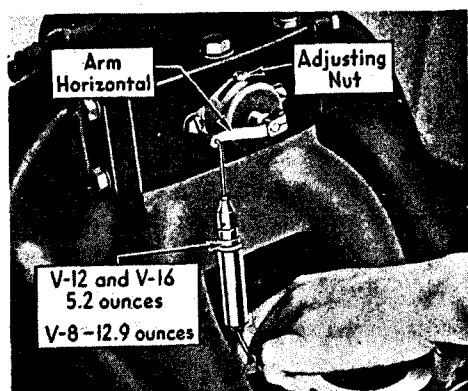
The thermostat in the semi-automatic choke on Cadillac cars should be adjusted by loosening the adjusting nut and sliding the thermostat stop until the required pull as indicated to hold the arm in a horizontal position is obtained
